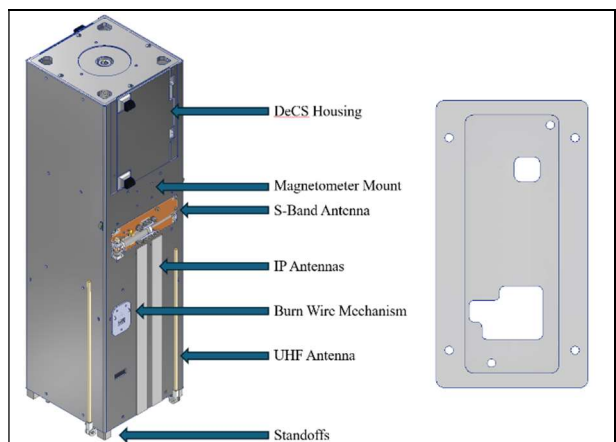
Sheet Metal Shell & S-Band Mounting Bracket – View 1
